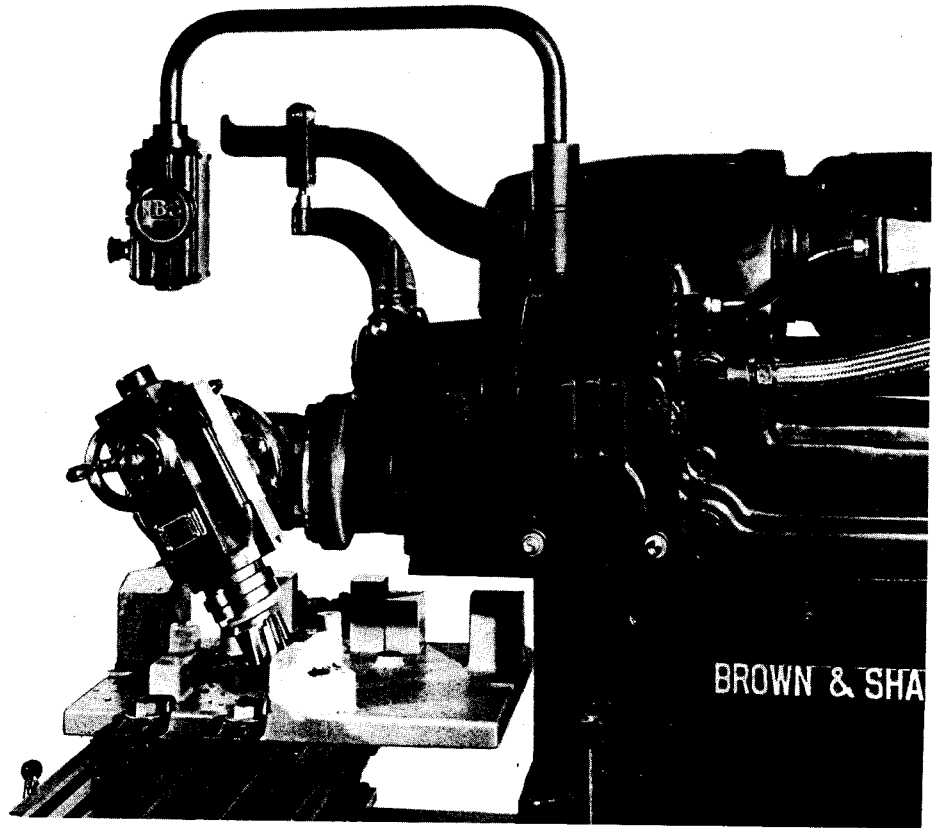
Setting-up for a step-milling job. Note the convenient location of the operating controls. The operator is bringing the workpiece (bolted to machine table) into transverse and longitudinal alignment with the cutter preparatory to making the first cut.
